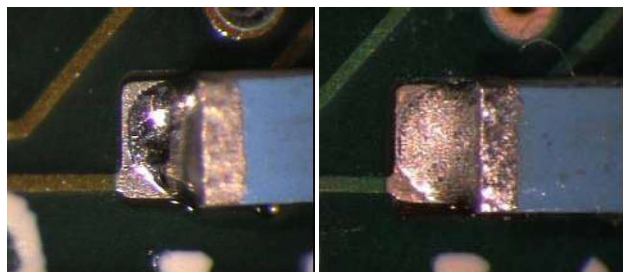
Visual inspection difference between SnPb solder joint (L) and SAC solder joint (R)
